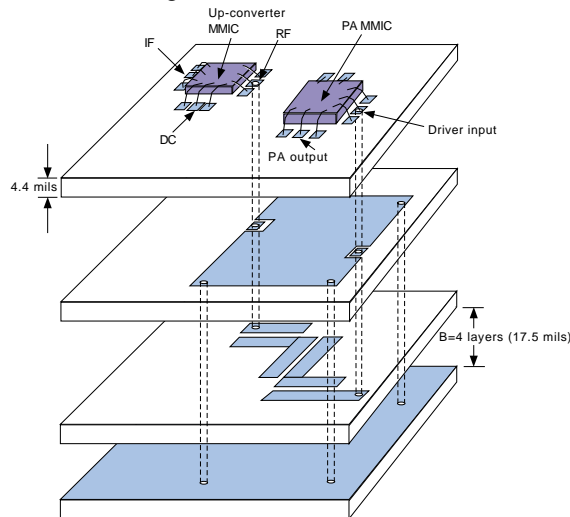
Exploded view of transmitter MCM module with LTCC integrated filter.
